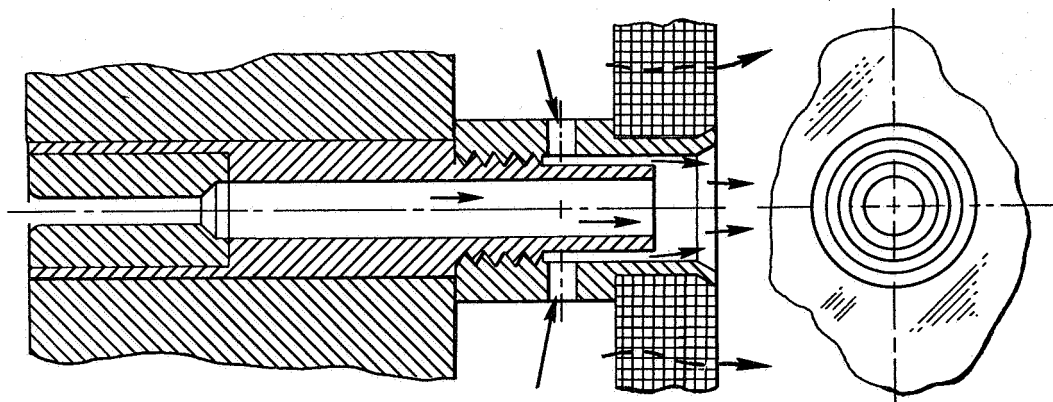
View of injector with convectively cooled baffle specimen installed.
